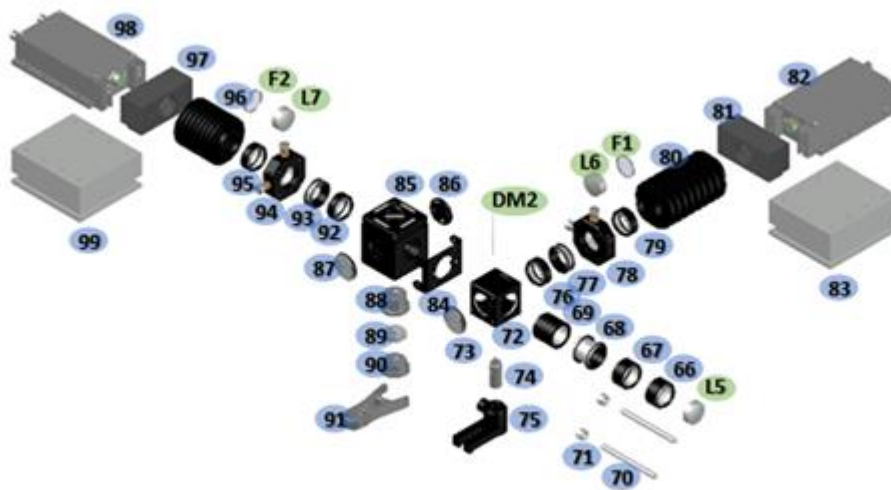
An exploded view of the emission path, with parts labelled according to Table 2.3.3
